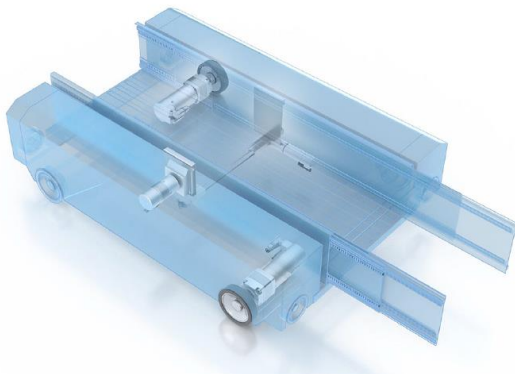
The ECI internal rotor motors, for example, are ideal for use as shuttle traction drives.
